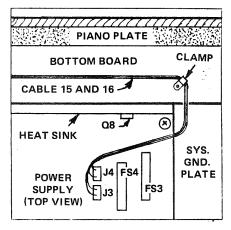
Cable Clamp mounted at Power Supply.
